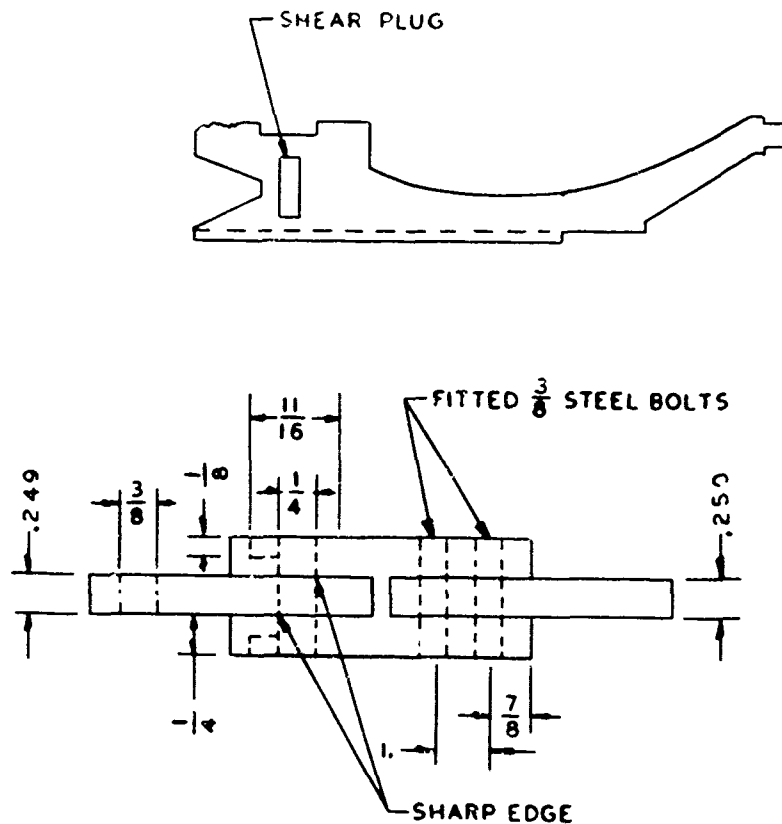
Shear Test Fixture and Orientation and Location of Shear Test Specimen
